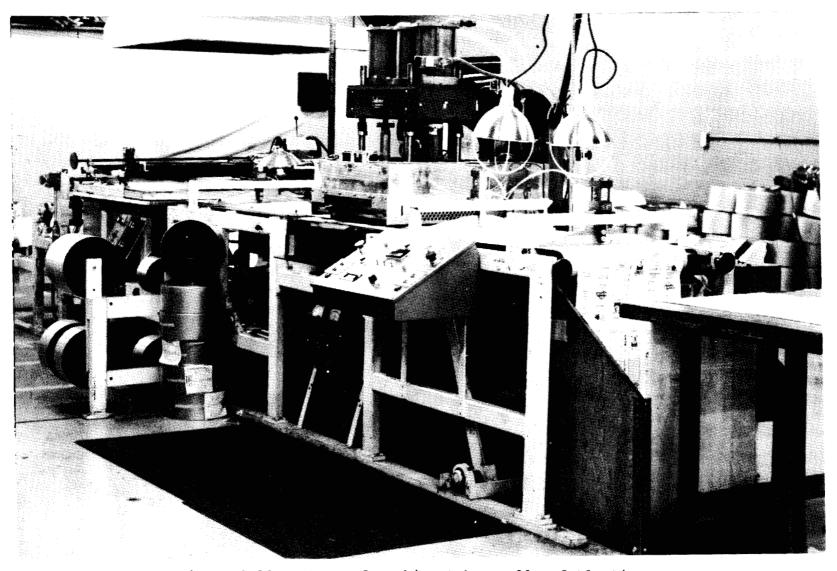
Automated machine takes rolls of plastic as input stock and delivers welded and printed telephone book jackets.
